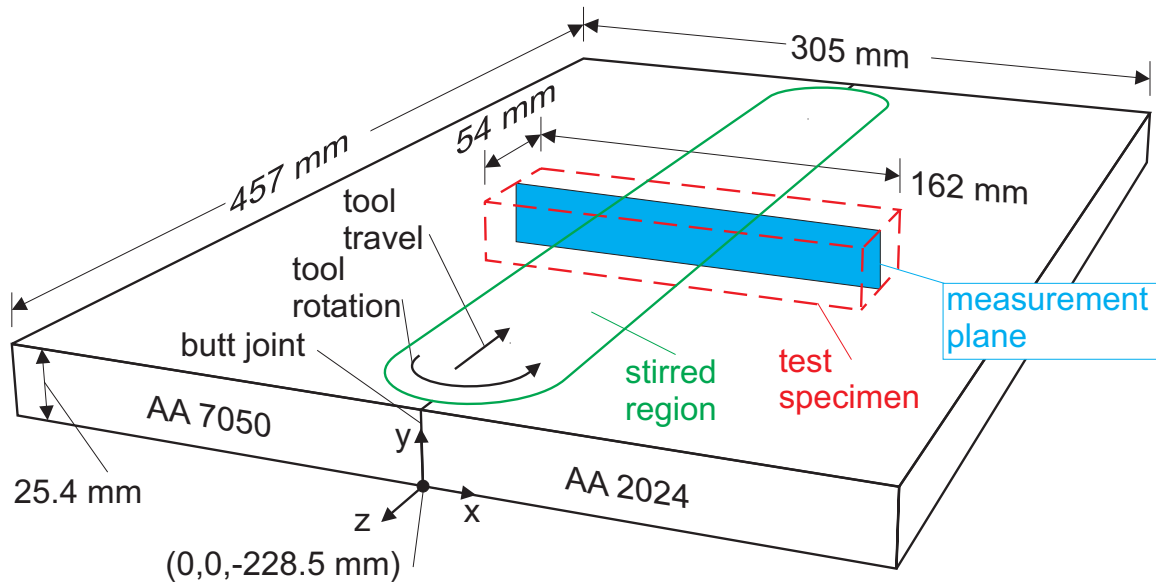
The parent weld plate showing dimensions and location of test specimen that was removed from the center.
